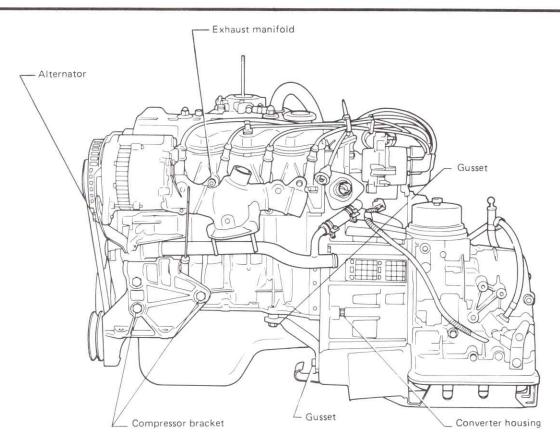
Engine external components viewed from front (automatic version shown) (Sec 13)
